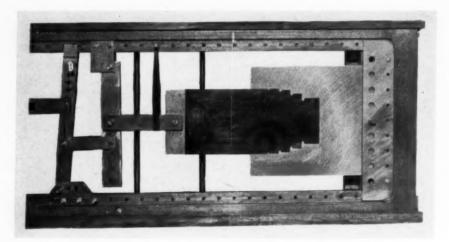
(Left)— Fastenings for Tjoint and dovetail. Fig. 12 (Above)— Testing an airplane propeller fastening
